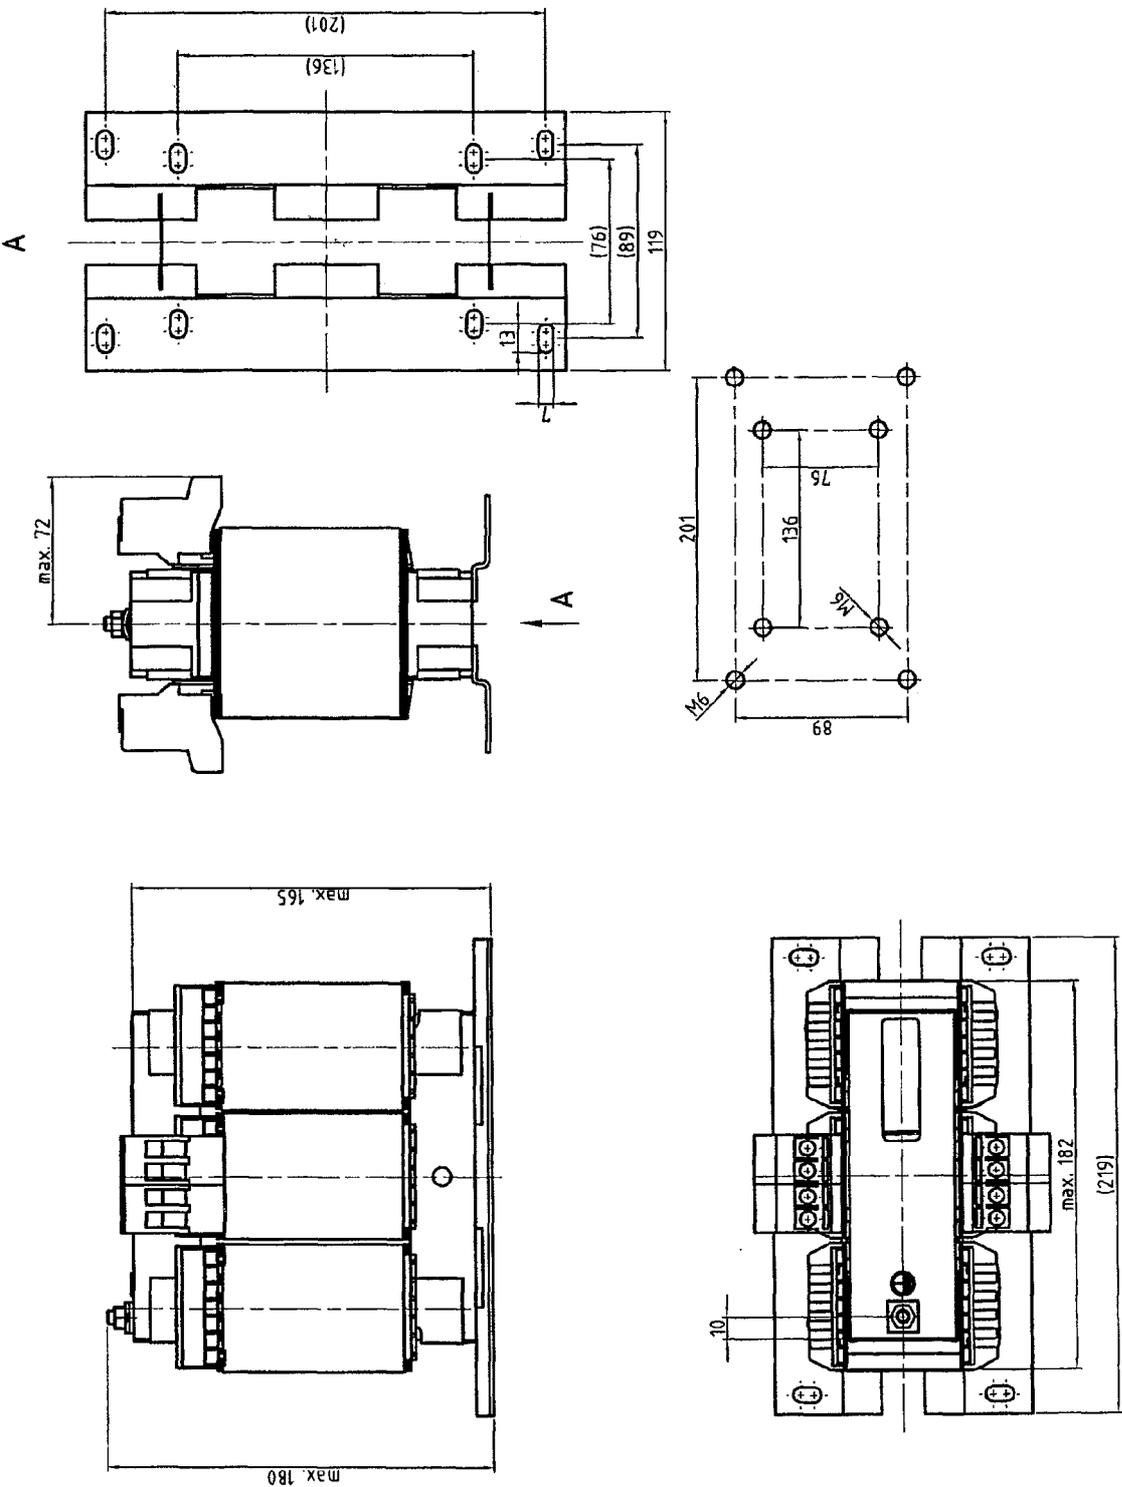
Dimension drawing of line reactor for the Smart Line Module 16 kW
